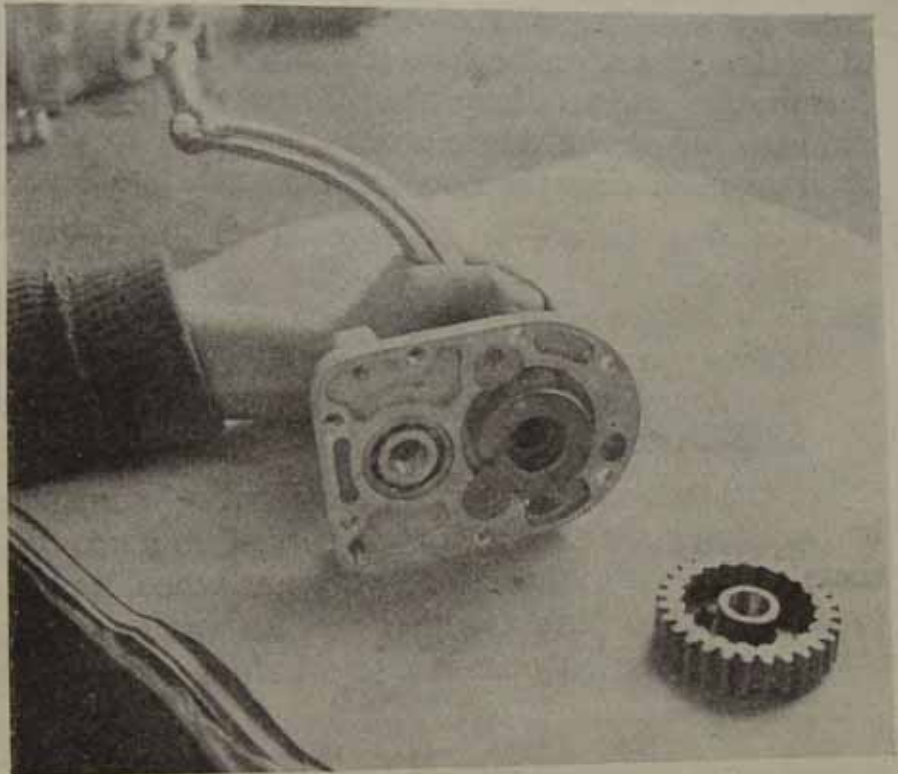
THE KICK-STARTER PARTS, WITH THE PAWL WHICH REVOLVES THE LOW GEAR WHEEL JUST DISENGAGED FROM THE CAM, WHICH DEPRESSES IT WHEN THE CRANK RETURNS TO REST. THE LOWER "CAM" IS THE STOP WHICH PREVENTS THE CRANK AND AXLE FROM GOING BACK TOO FAR AND LETTING THE PAWL INTO ENGAGEMENT AGAIN.
